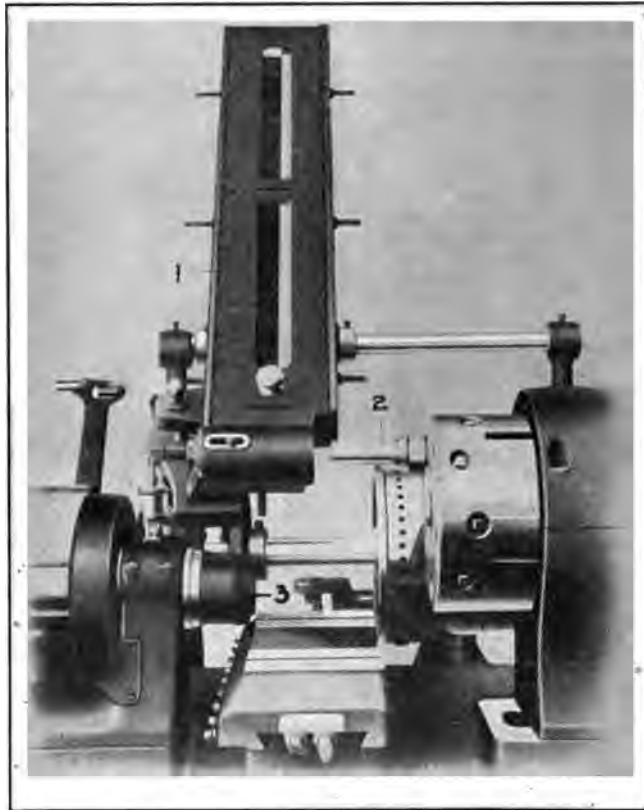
TILTING MAGAZINE ATTACHMENT. CLEVELAND AUTOMATIC MACHINE CO.
